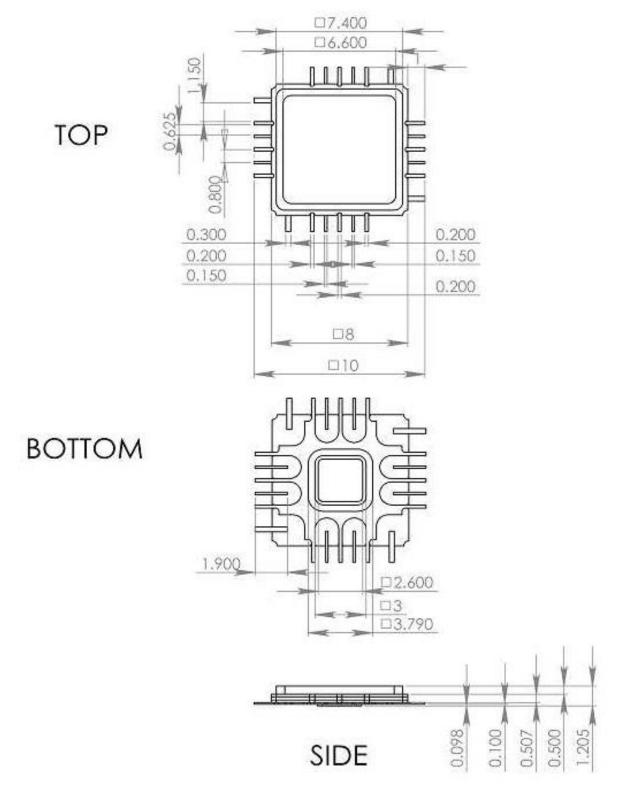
CQFP 24-Pin Package Drawing (All Dimensions in mm)
